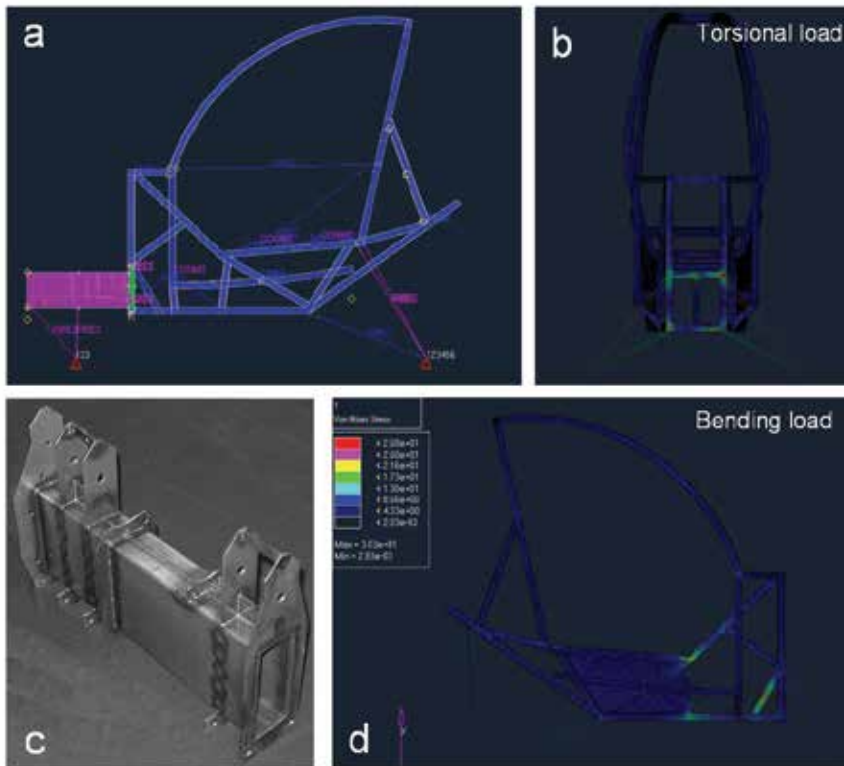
Prototype enclosed frame a) model side view, b) torsional load FEM front view c) front frame d) bending load FEM side view
